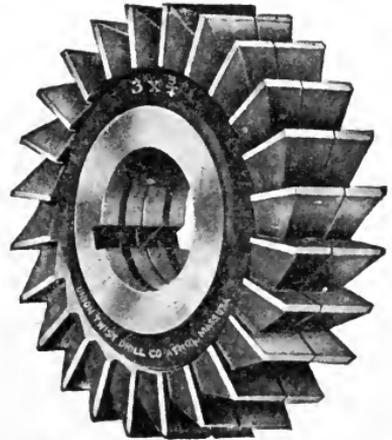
Interlocking Cutter with Four Teeth Cut Away
